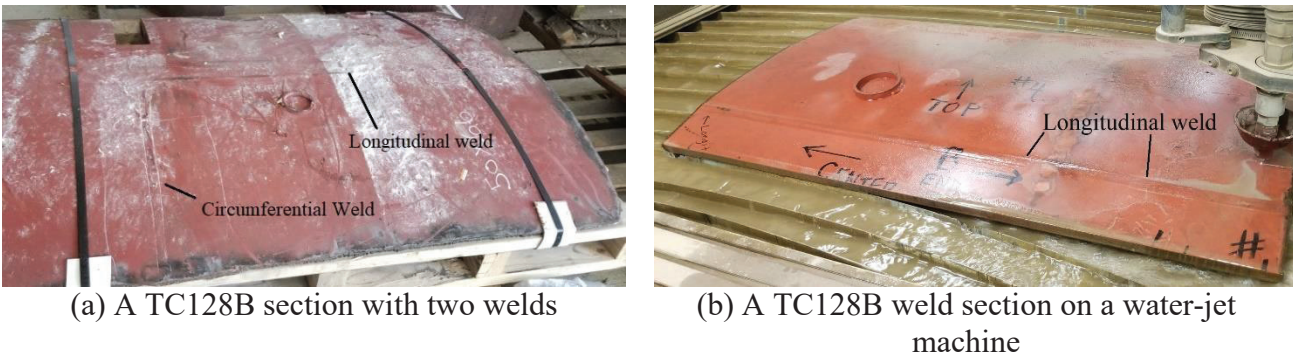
Tank car TC128B longitudinal weld samples.
